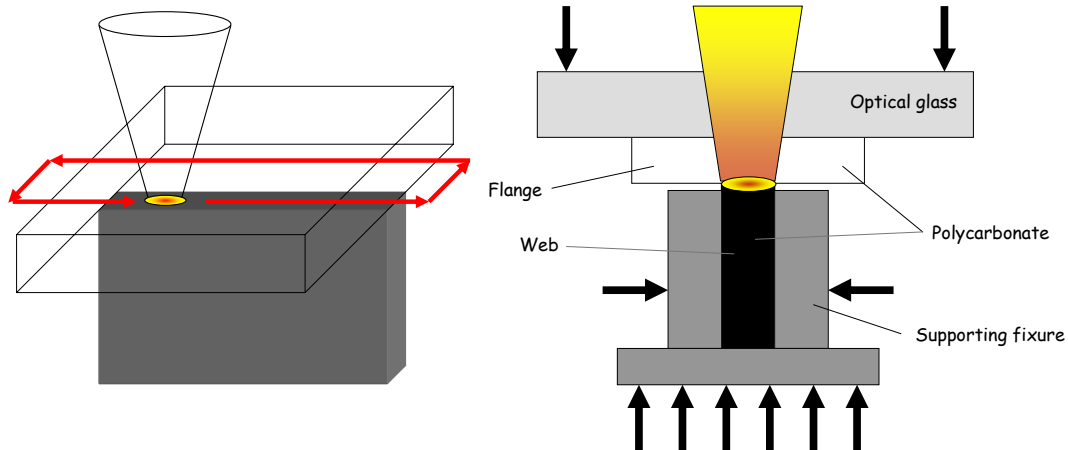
Experimental setup of the T-joint welding tests.
